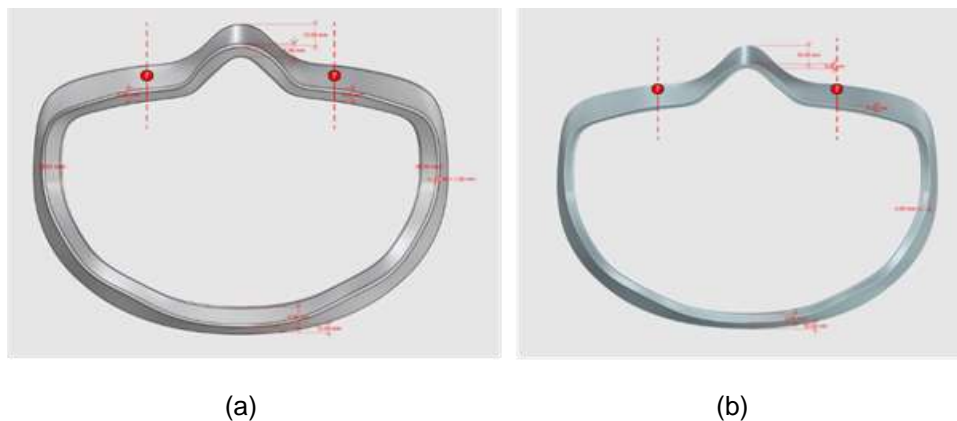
Digital prototypes of Base Frame and Covering Piece. (a) Base Frame outer surface (b) Covering Piece outer surface.
